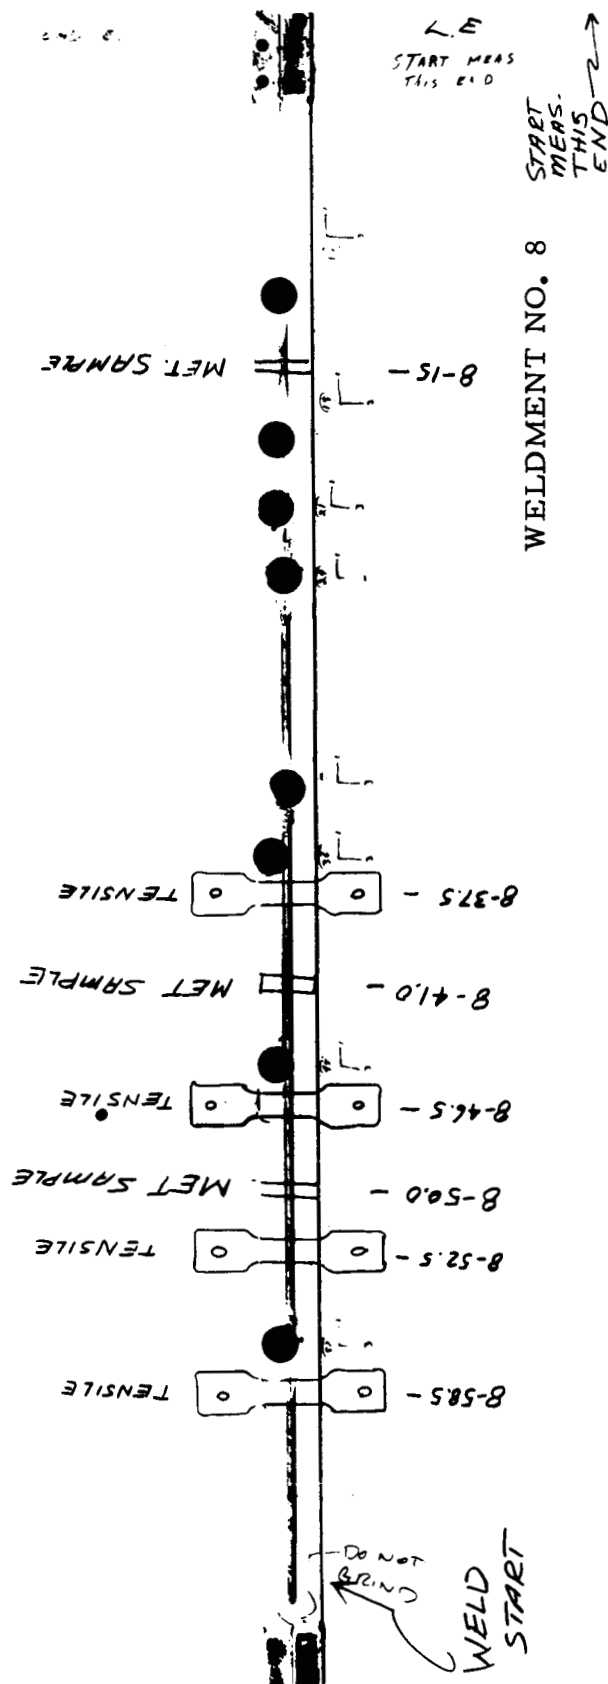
Location of Tensile and Metallographic Samples for Weldment No. 8 (Strained Before Welding)
